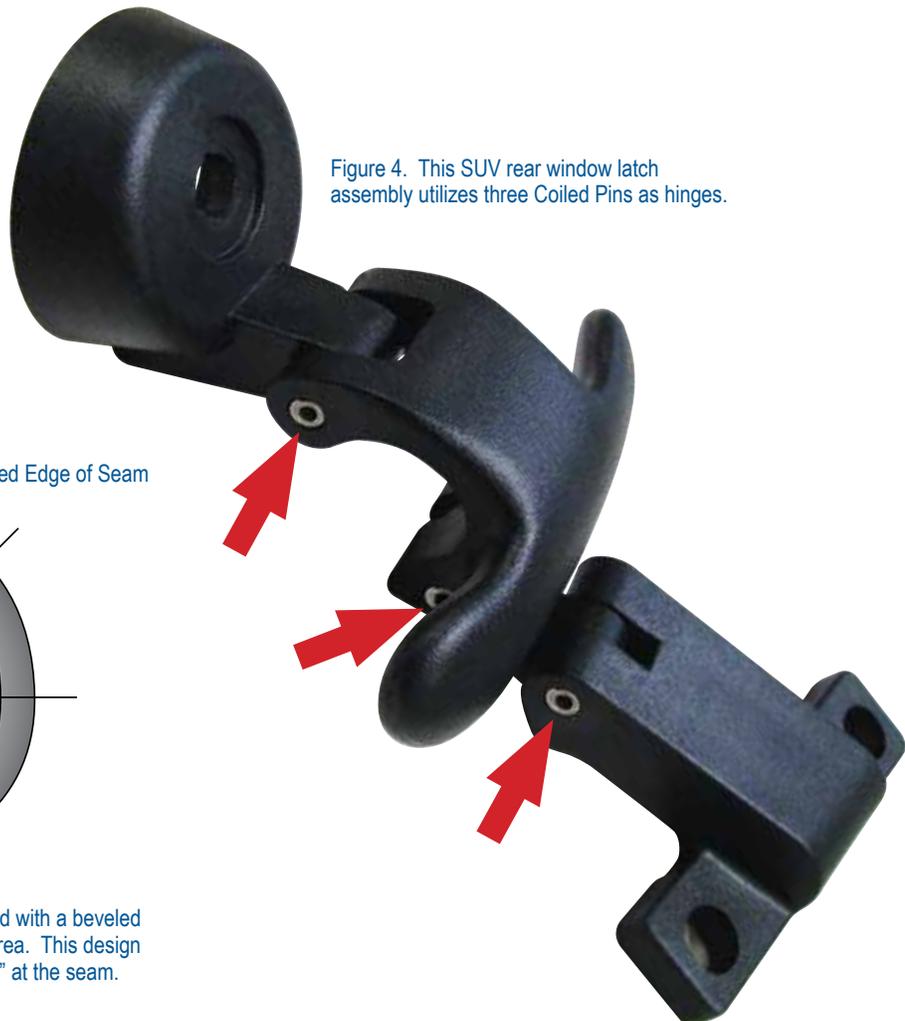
This SUV rear window latch assembly utilizes three Coiled Pins as hinges.
